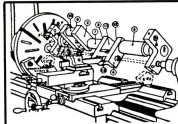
Turning a Two-Thread 90° Square Threaded Rod.
